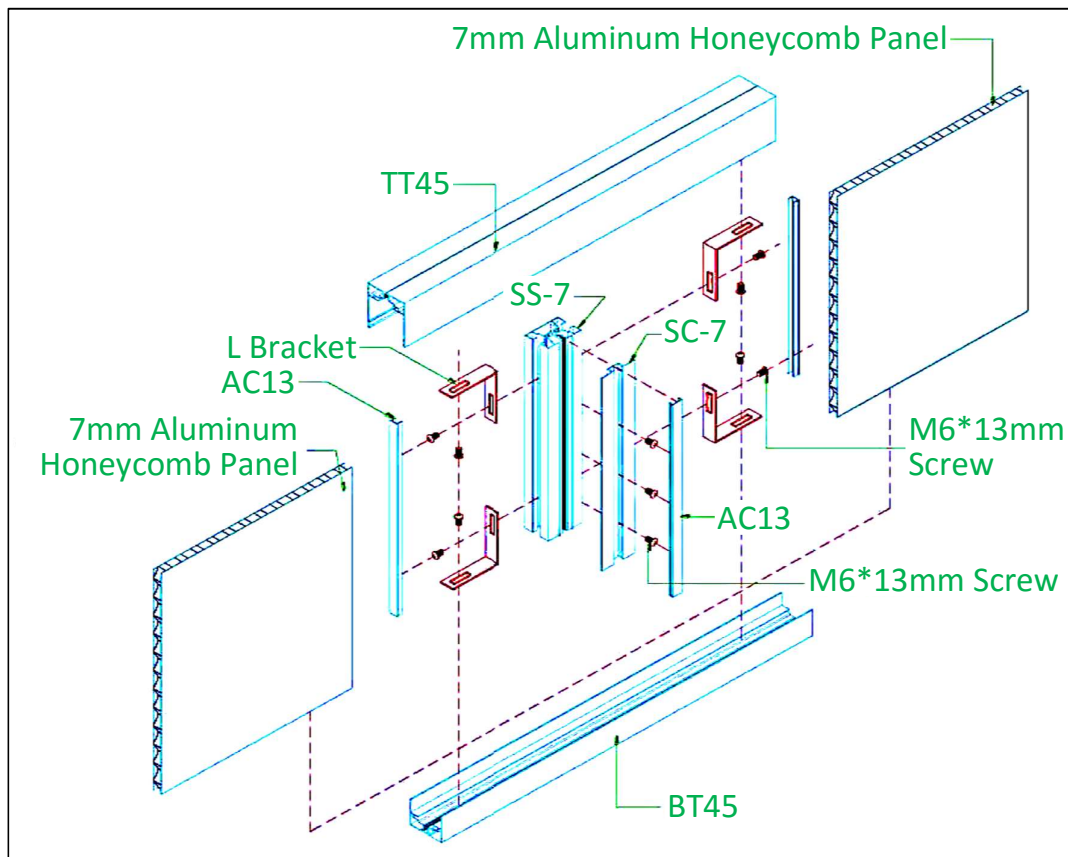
SFL2000 System Disassemble Drawing (Internal)
